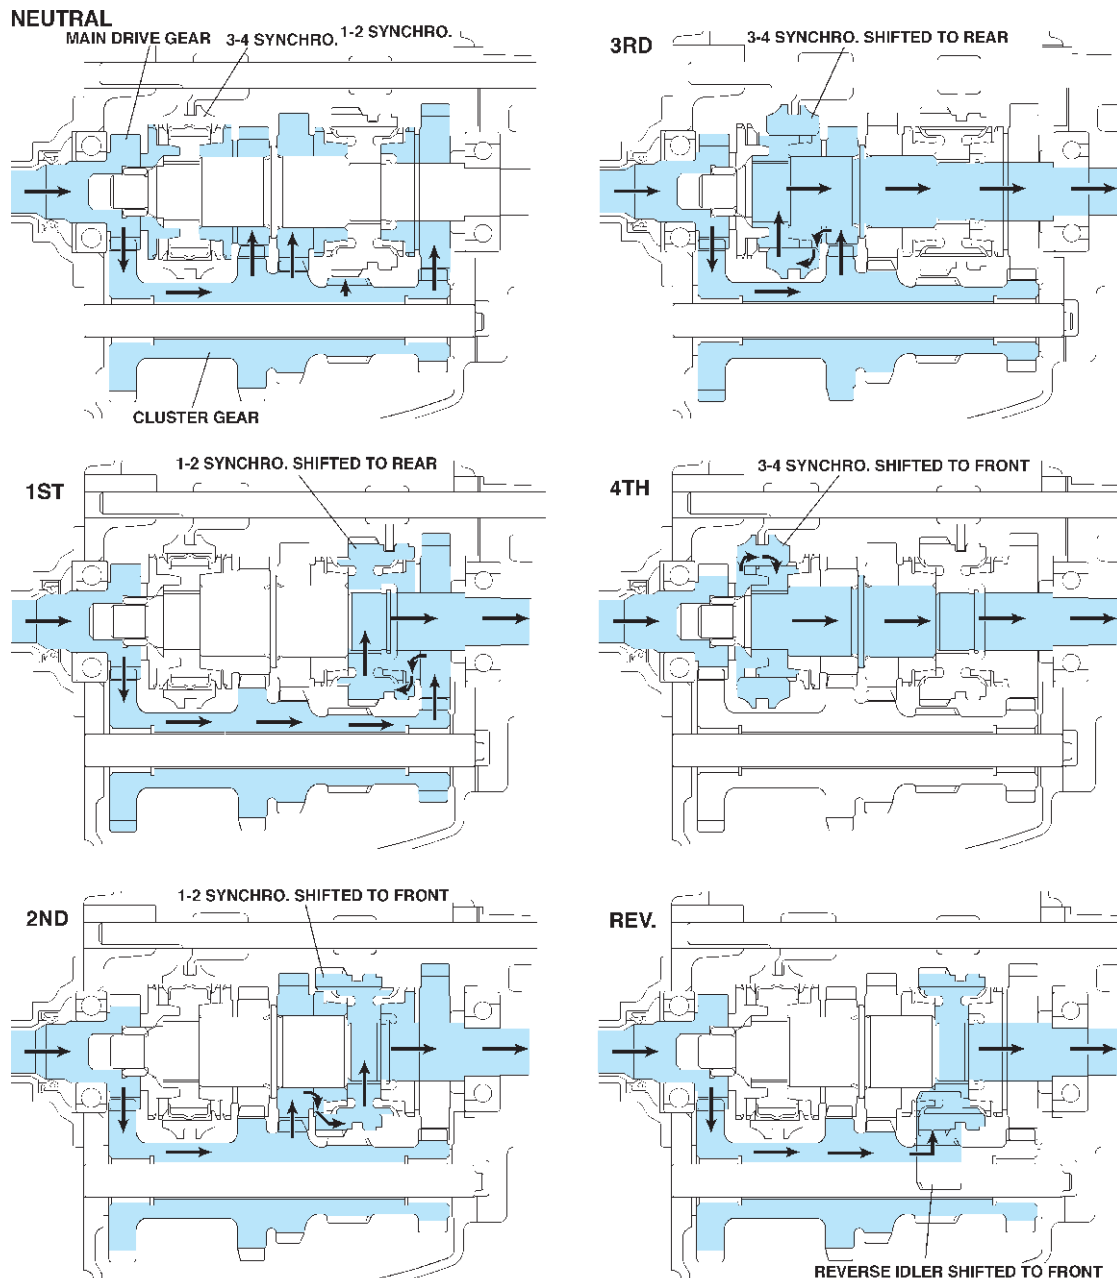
Power flows through a four-speed transmission. Note how the 1–2 and 3–4 synchronizer sleeves and the reverse idler gear are moved for the shifts.
